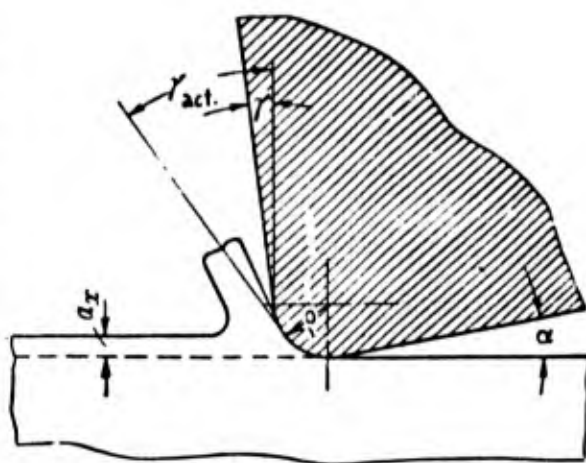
Diagram of Bite of Cutting Edge of Face Mill at Small Thickness of Cut
